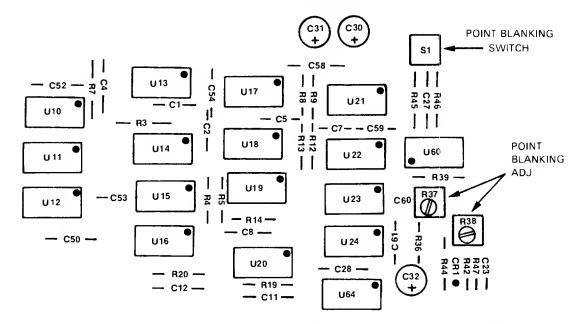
Point Blanking Switch and Adjustment Locations on Control Board
